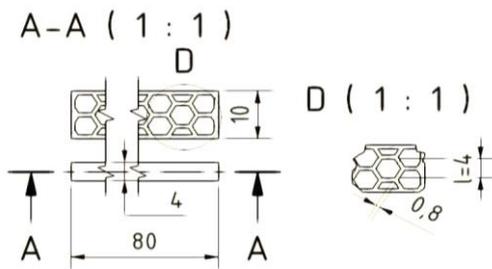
Specimen with hexagonal shape and 4 mm dimension of inner structure
